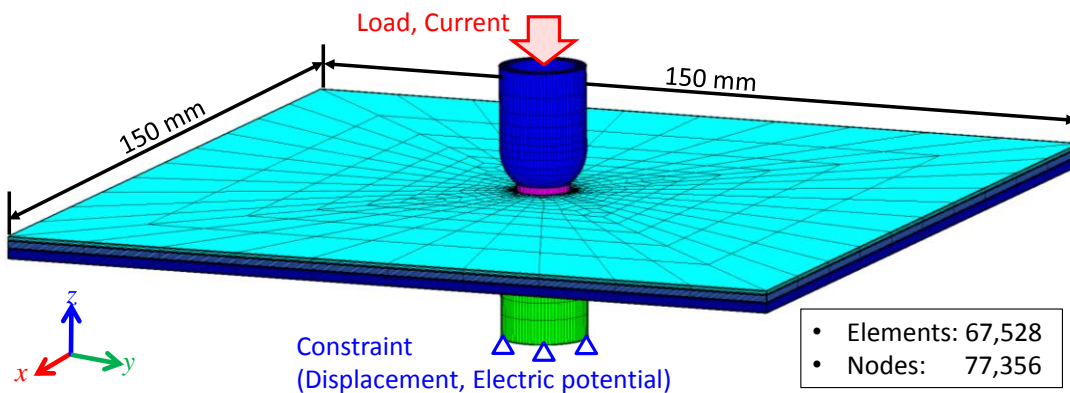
Analysis model of single point spot welding.
